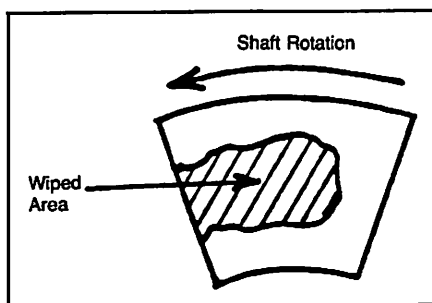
A burned or wiped surface pattern indicates the bearing's pad surface is excessively crowned.
